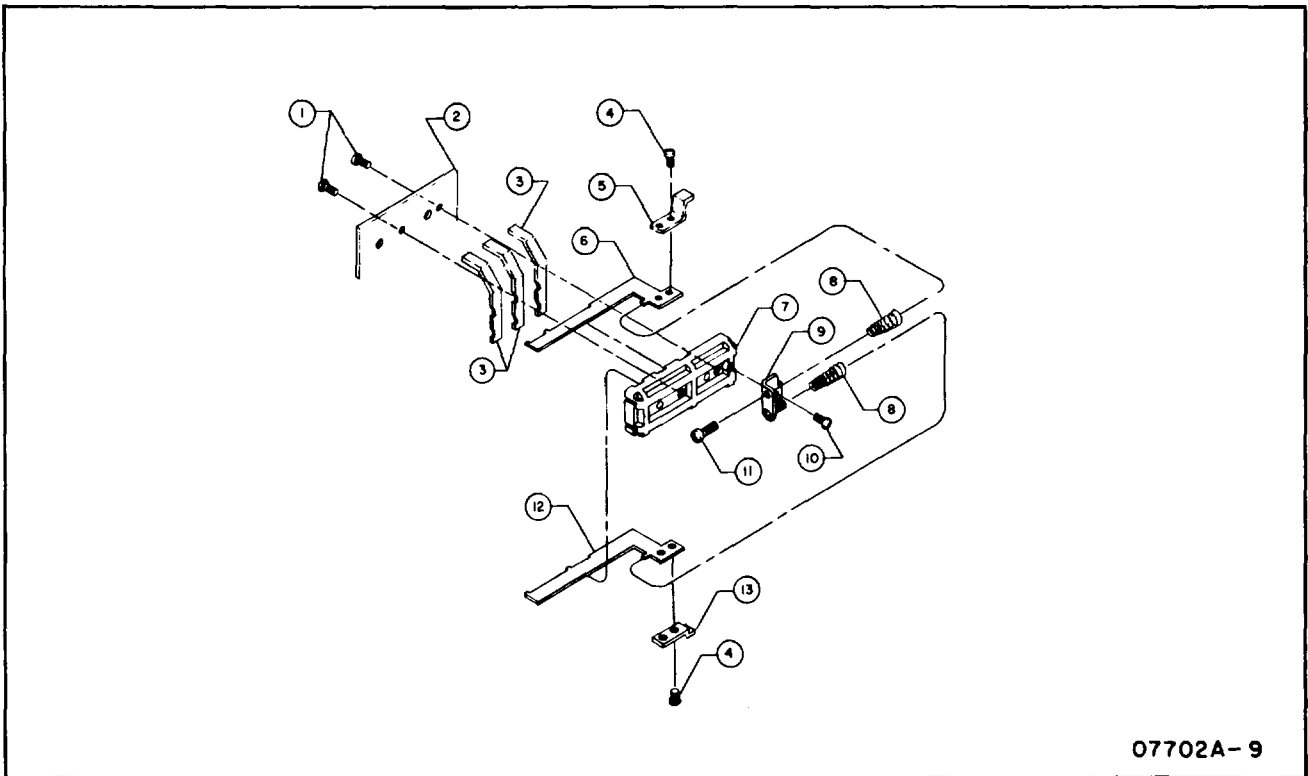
Clutch Actuator Assembly (07702 - 60100)
